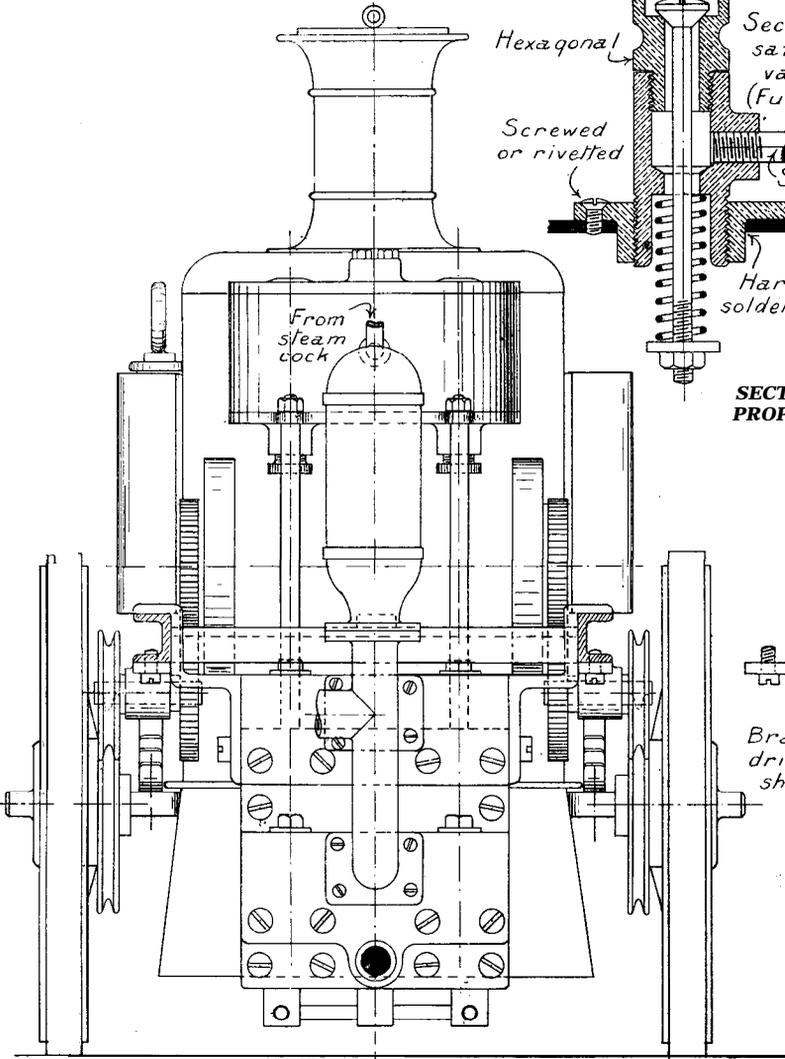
SECTION THROUGH MODEL, SHOWING ARRANGEMENT OF ENGINE, PUMPS, AND GEARING.
